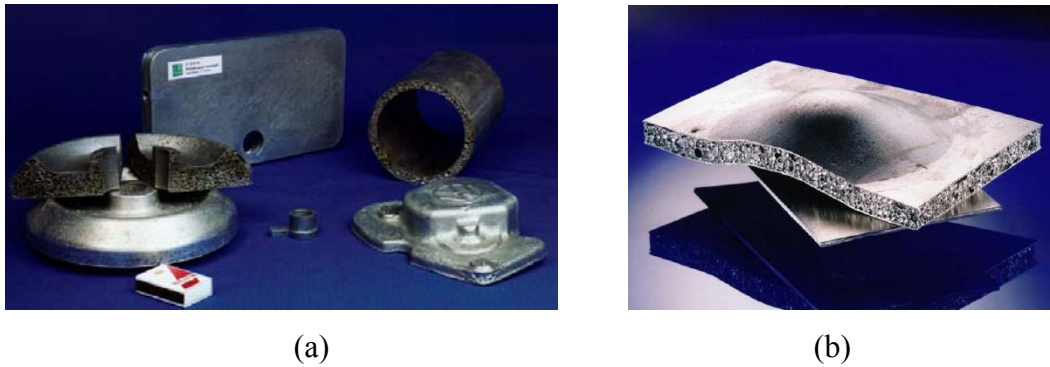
(a) complicated foam parts (b) sandwich foam panel.
